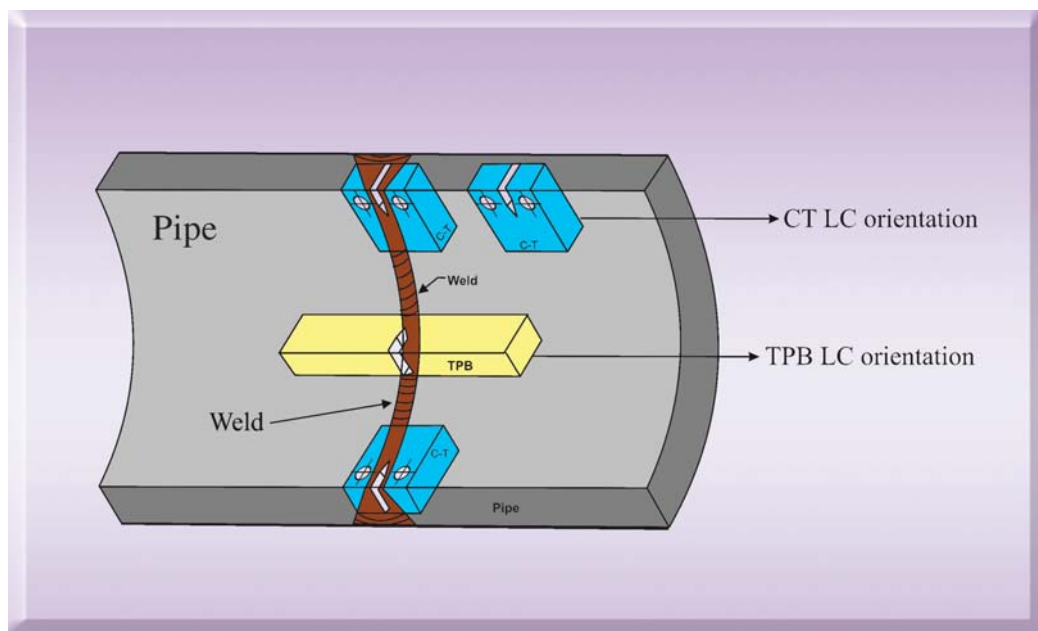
(a): Location of the specimens with respect to pipe weld
